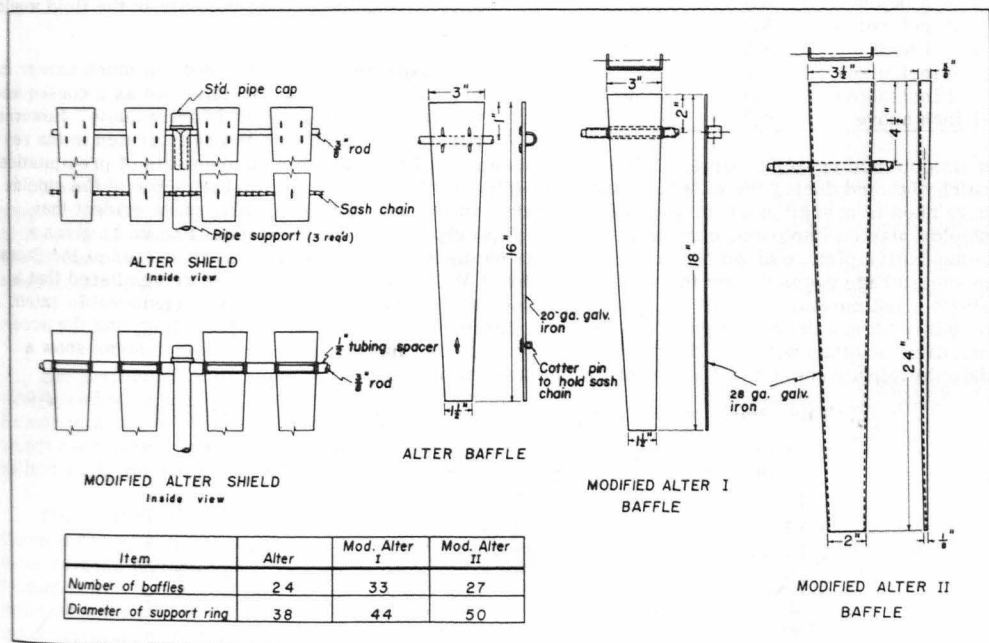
Comparative dimensions and details for Alter windshield and modified Alter windshields
